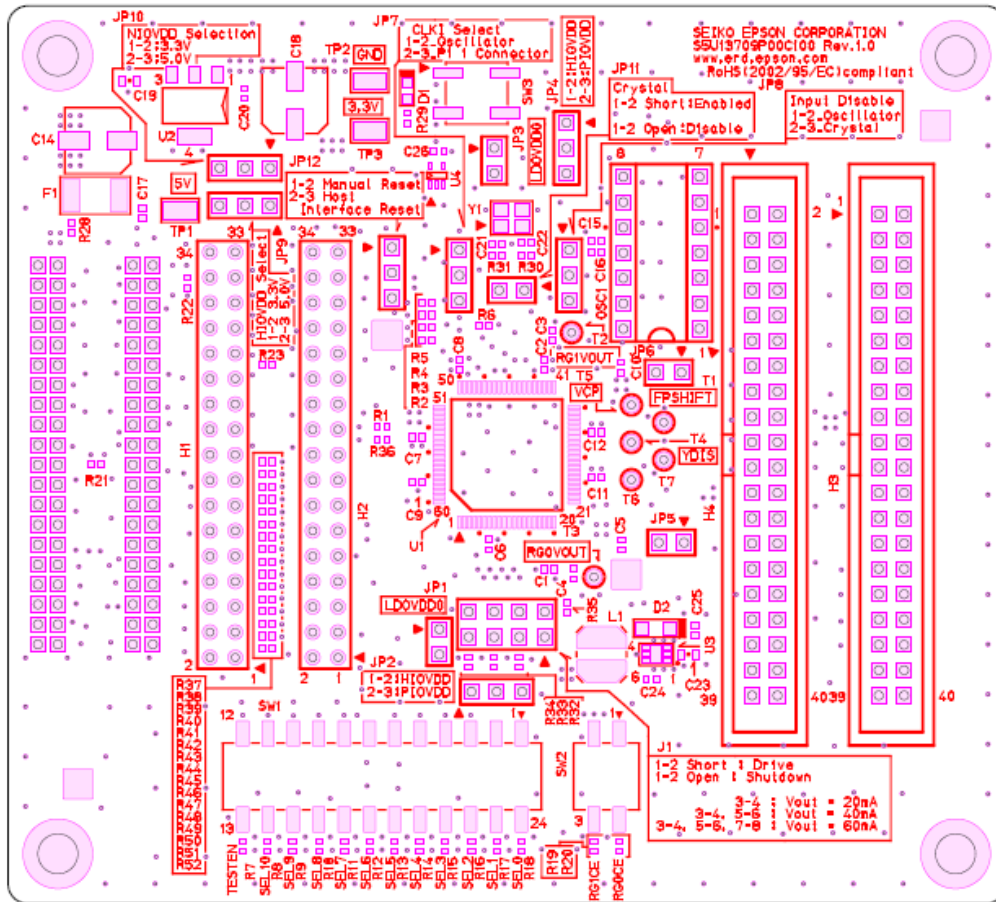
S5U13709P00C100 Board Layout – Parts Side
